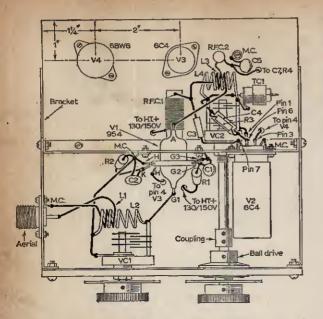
Top view of chassis layout. Note the positioning of the components. At these high frequencies the shortest possible leads should be used.
